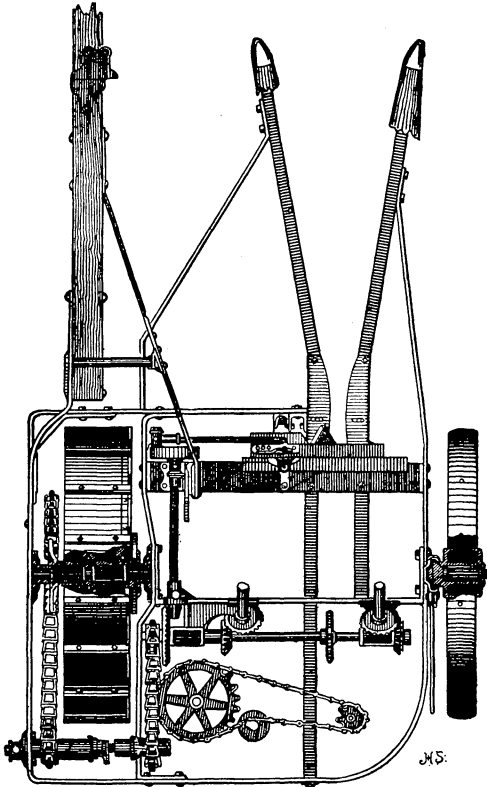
Frame of corn binder, showing mechanism for driving cutter knife, gear shaft for driving chains and binding device, and roller bearings.
